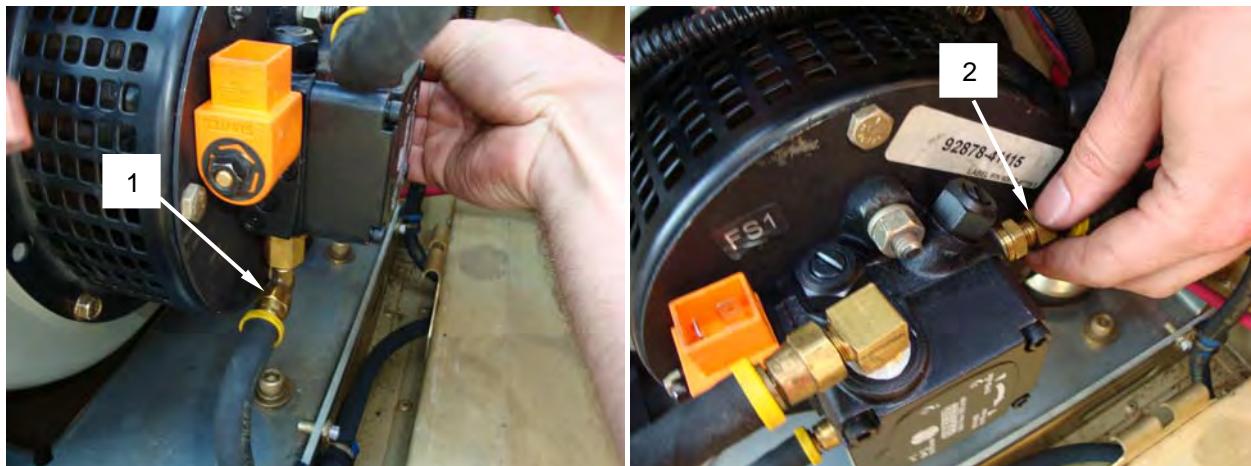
Connect Two Fuel Hoses to Burner Fuel Pump.
